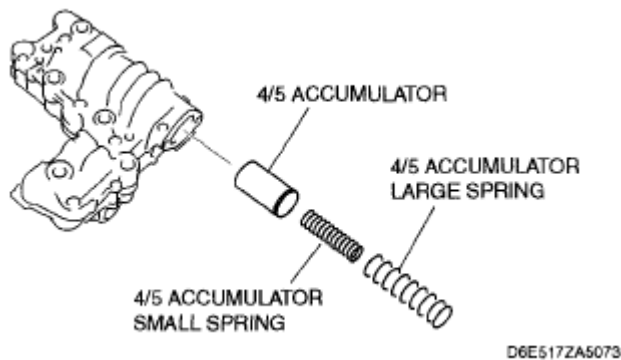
View Of 4/5 Accumulator, 4/5 Accumulator Small Spring And 4/5 Accumulator Large Spring
